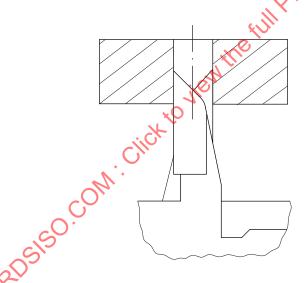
Example of test arrangement for shift error — Internal measurement of 5 mm diameter using the crossed knife-edge internal measuring faces
